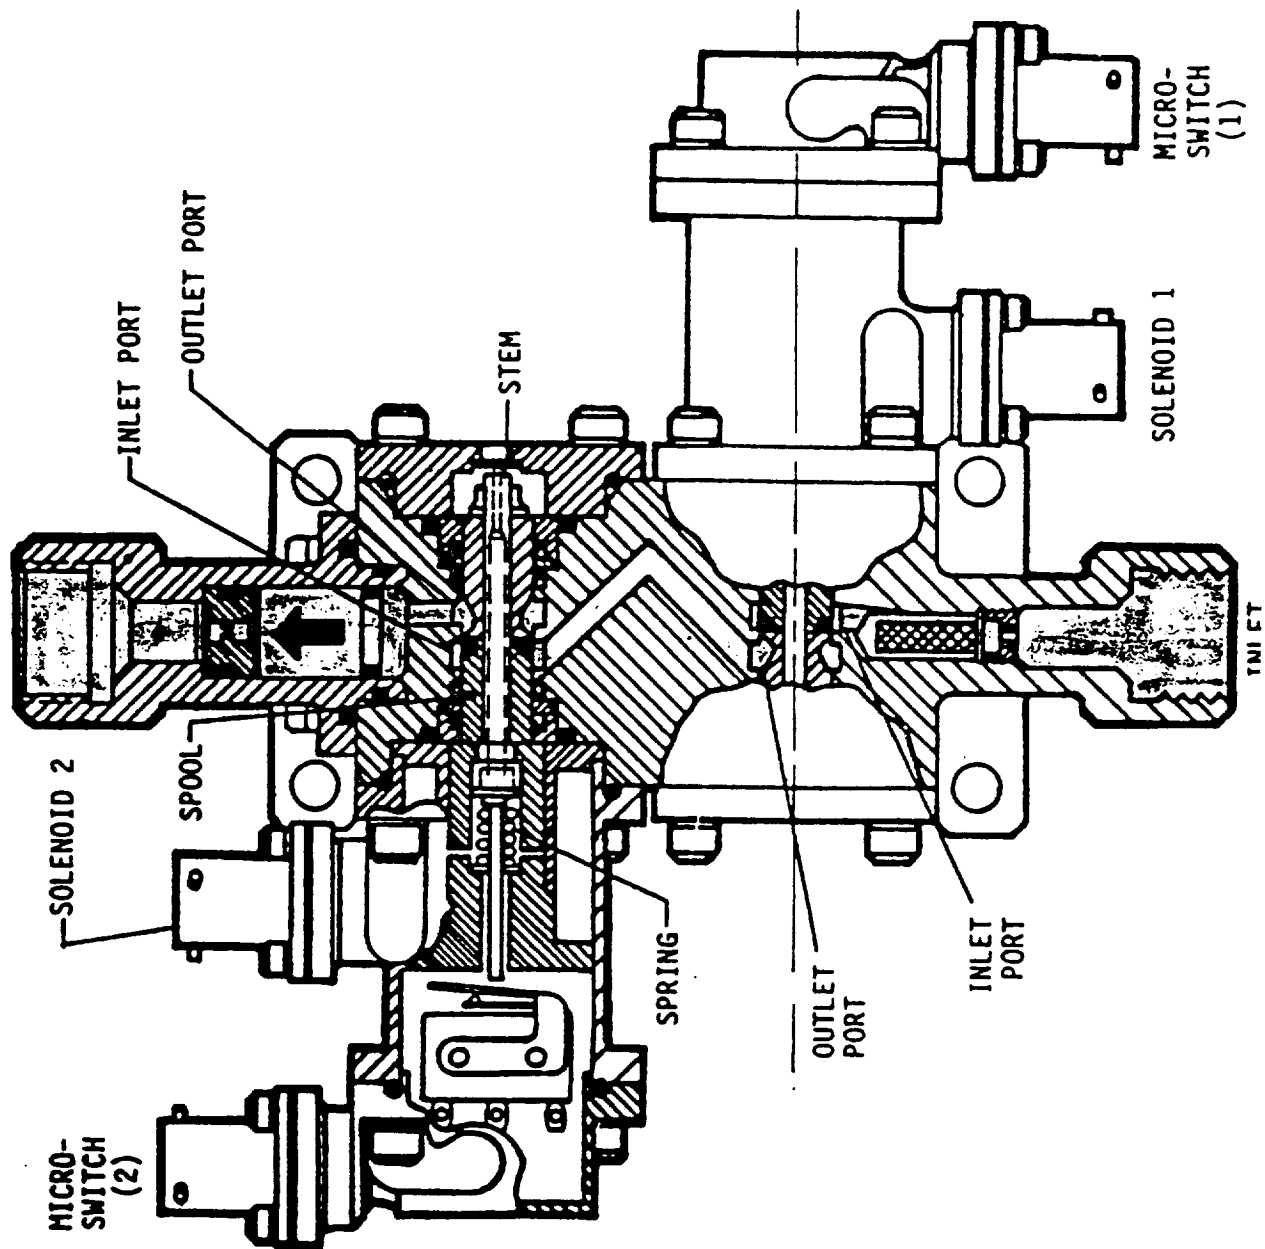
PURGE VALVE ASSEMBLY CROSS SECTION
